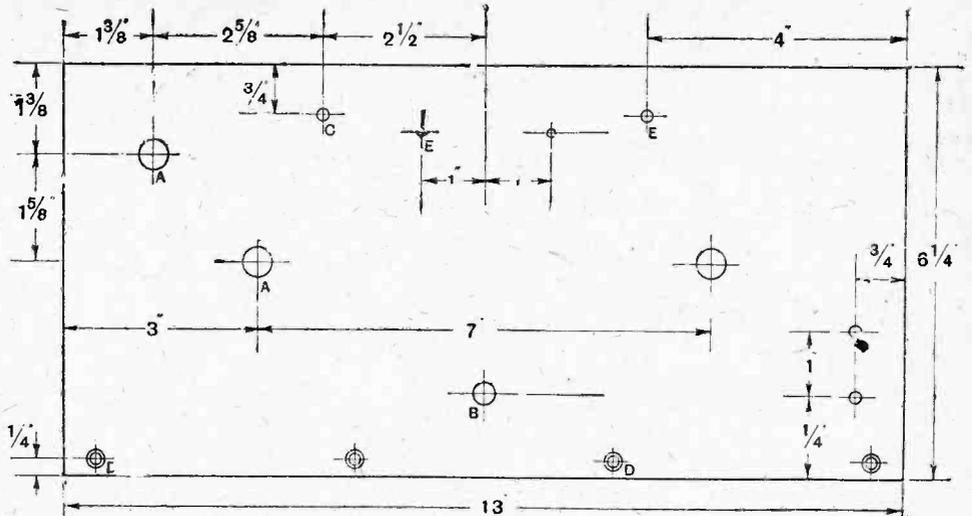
Details for drilling the front panel. Sizes of holes: A = 7/16 in.; B = 5/16 in.; C = 5/32 in.; D = 5/32 in. and countersunk; E = 1/8 in.
